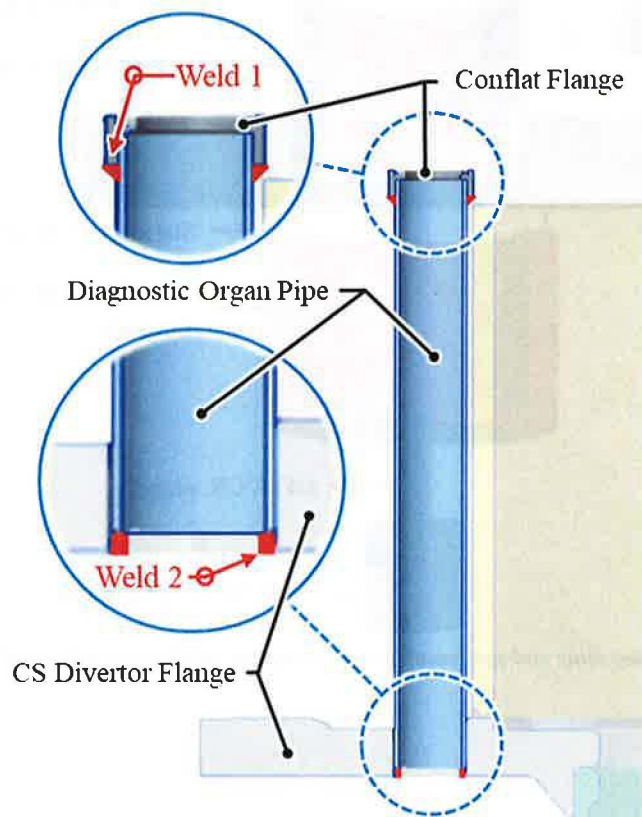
Welds to be tested during the fabrication and installation of the organ pipes
